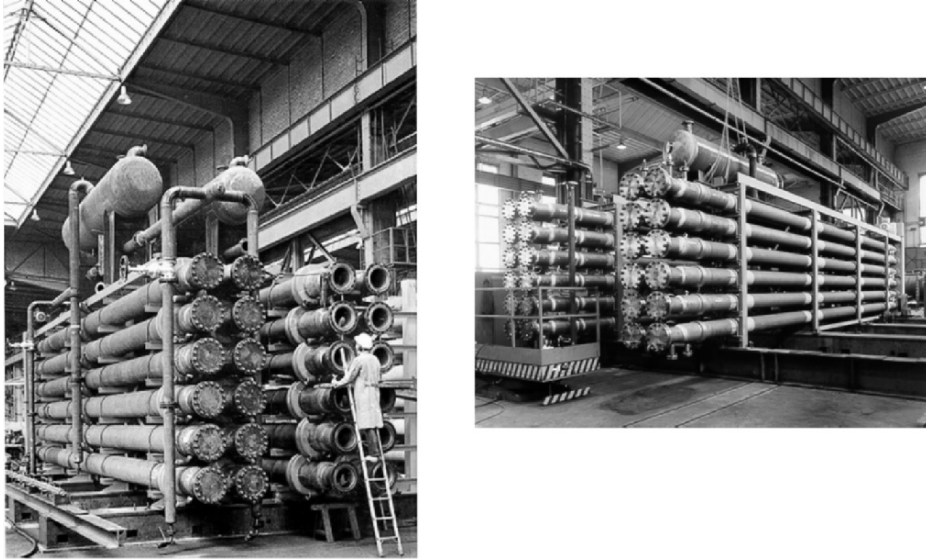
Scraped Surface Equipment (photos reprinted courtesy Borsig®)
